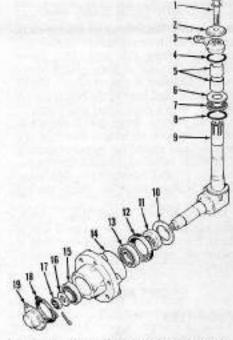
Exploded view of typical front spindle essembly showing component parts and their relative positions.
